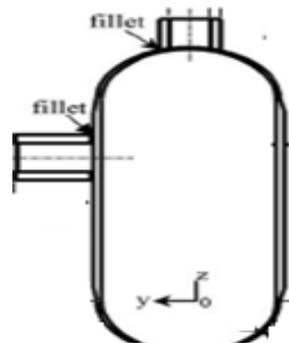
Nozzles welded cylindrical pressure vessel (Cross section) [3]
